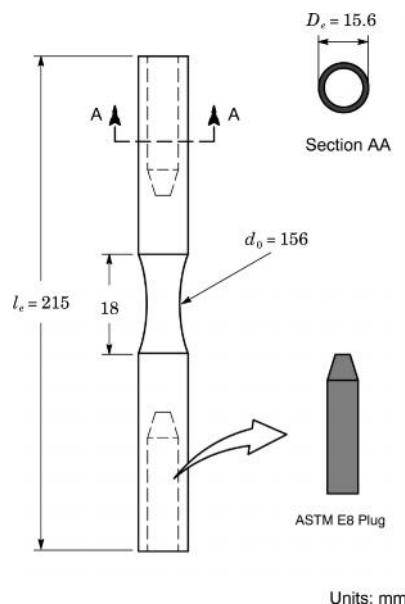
Small-size, unwelded tubular specimens designed for conventional uniaxial fatigue testing.
